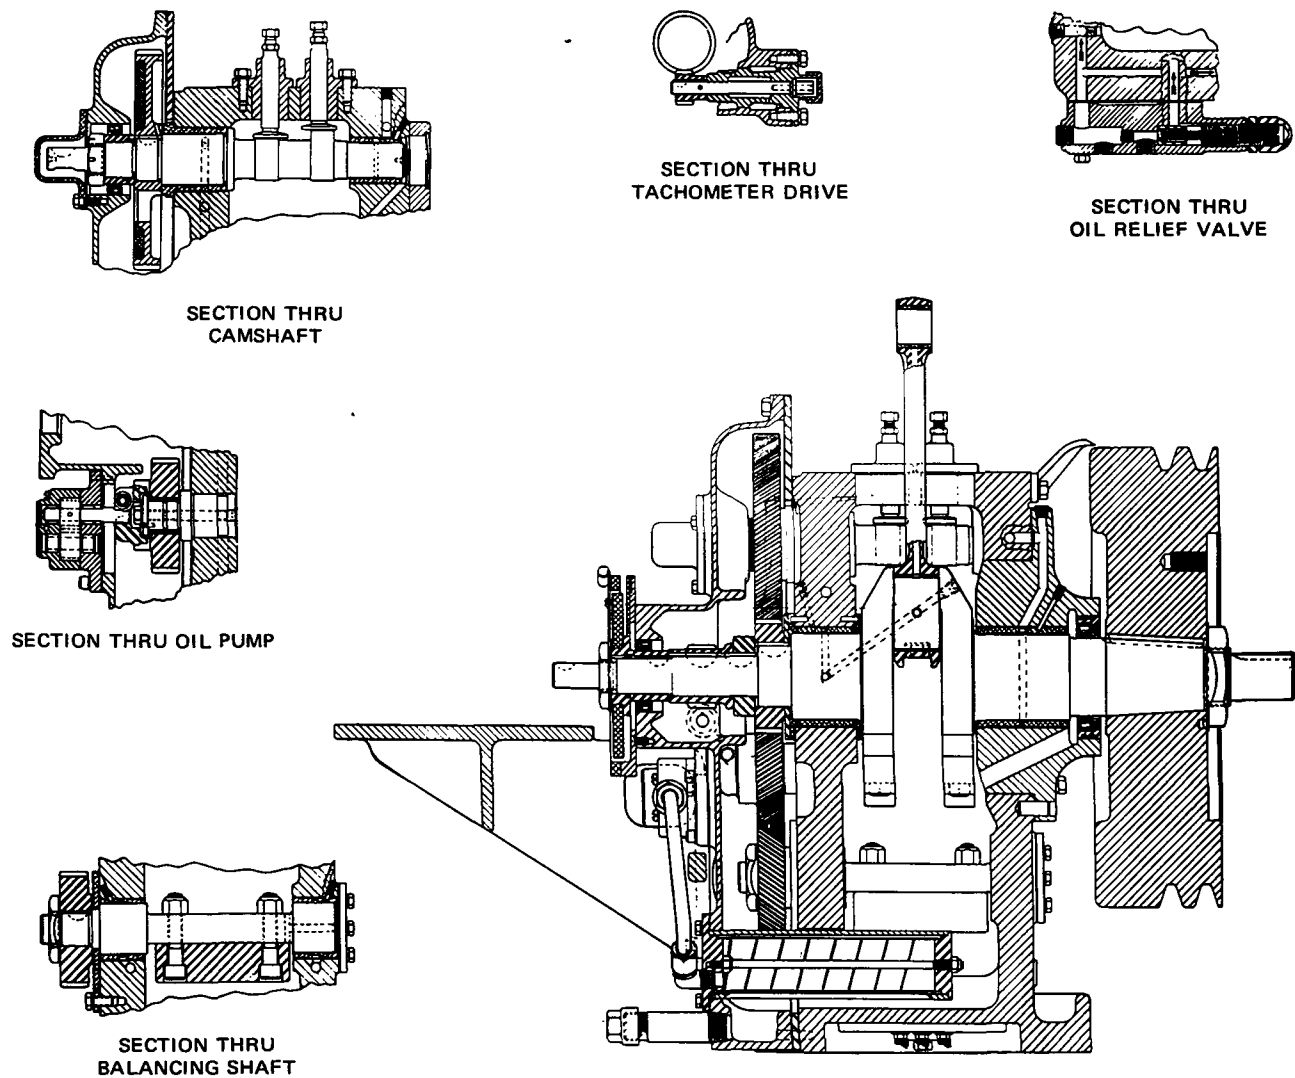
Waukesha CFR-48 Crankcase Assembly
